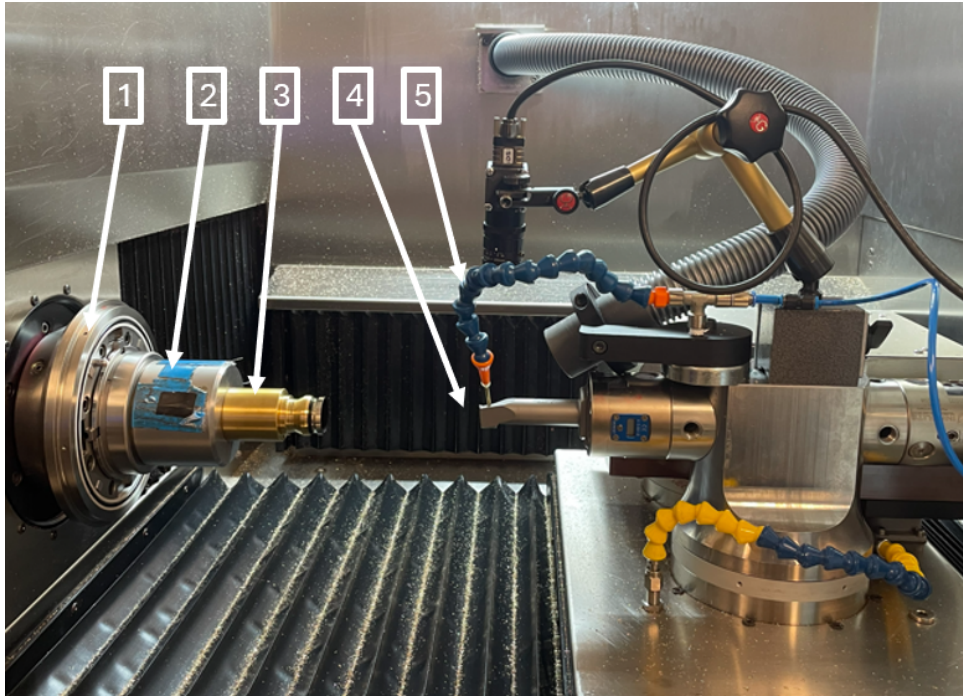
The main components of the turning machine. 1. Spindle. 2. Workpiece holder. 3. Workpiece. 4. Diamond cutting tool. 5. Cooling air supply.
